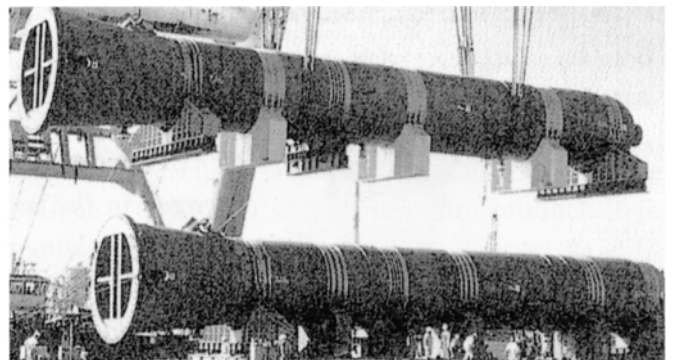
The world's largest heavy oil desulfurization reactor vessel having a shell of 330-mm thick and weighing 1400 tons (Photo source: *Welding Technique*, Vol. 47, Japan Welding Engineering Society)
